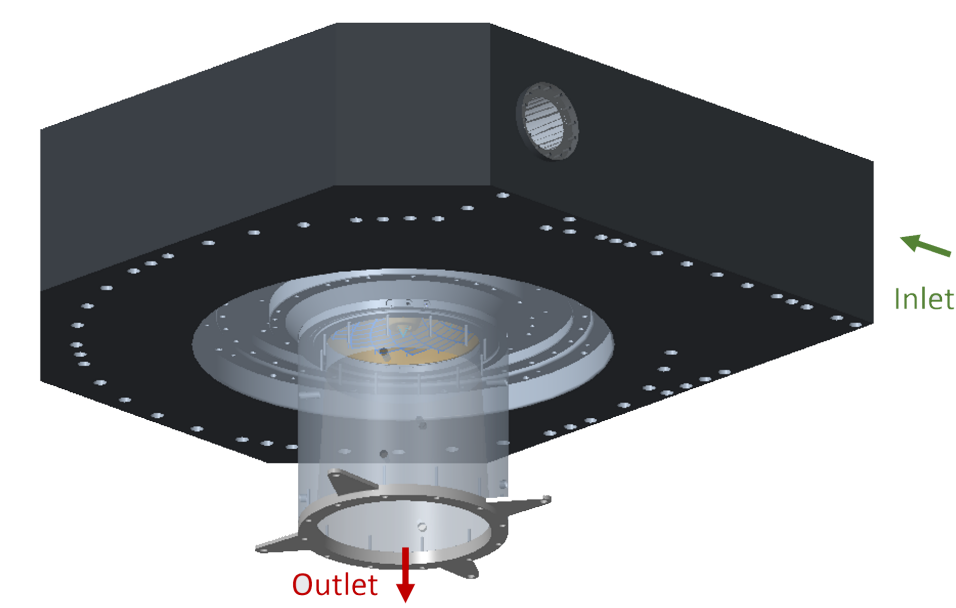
Test section with arrows indicating flow inlet and outlet.
